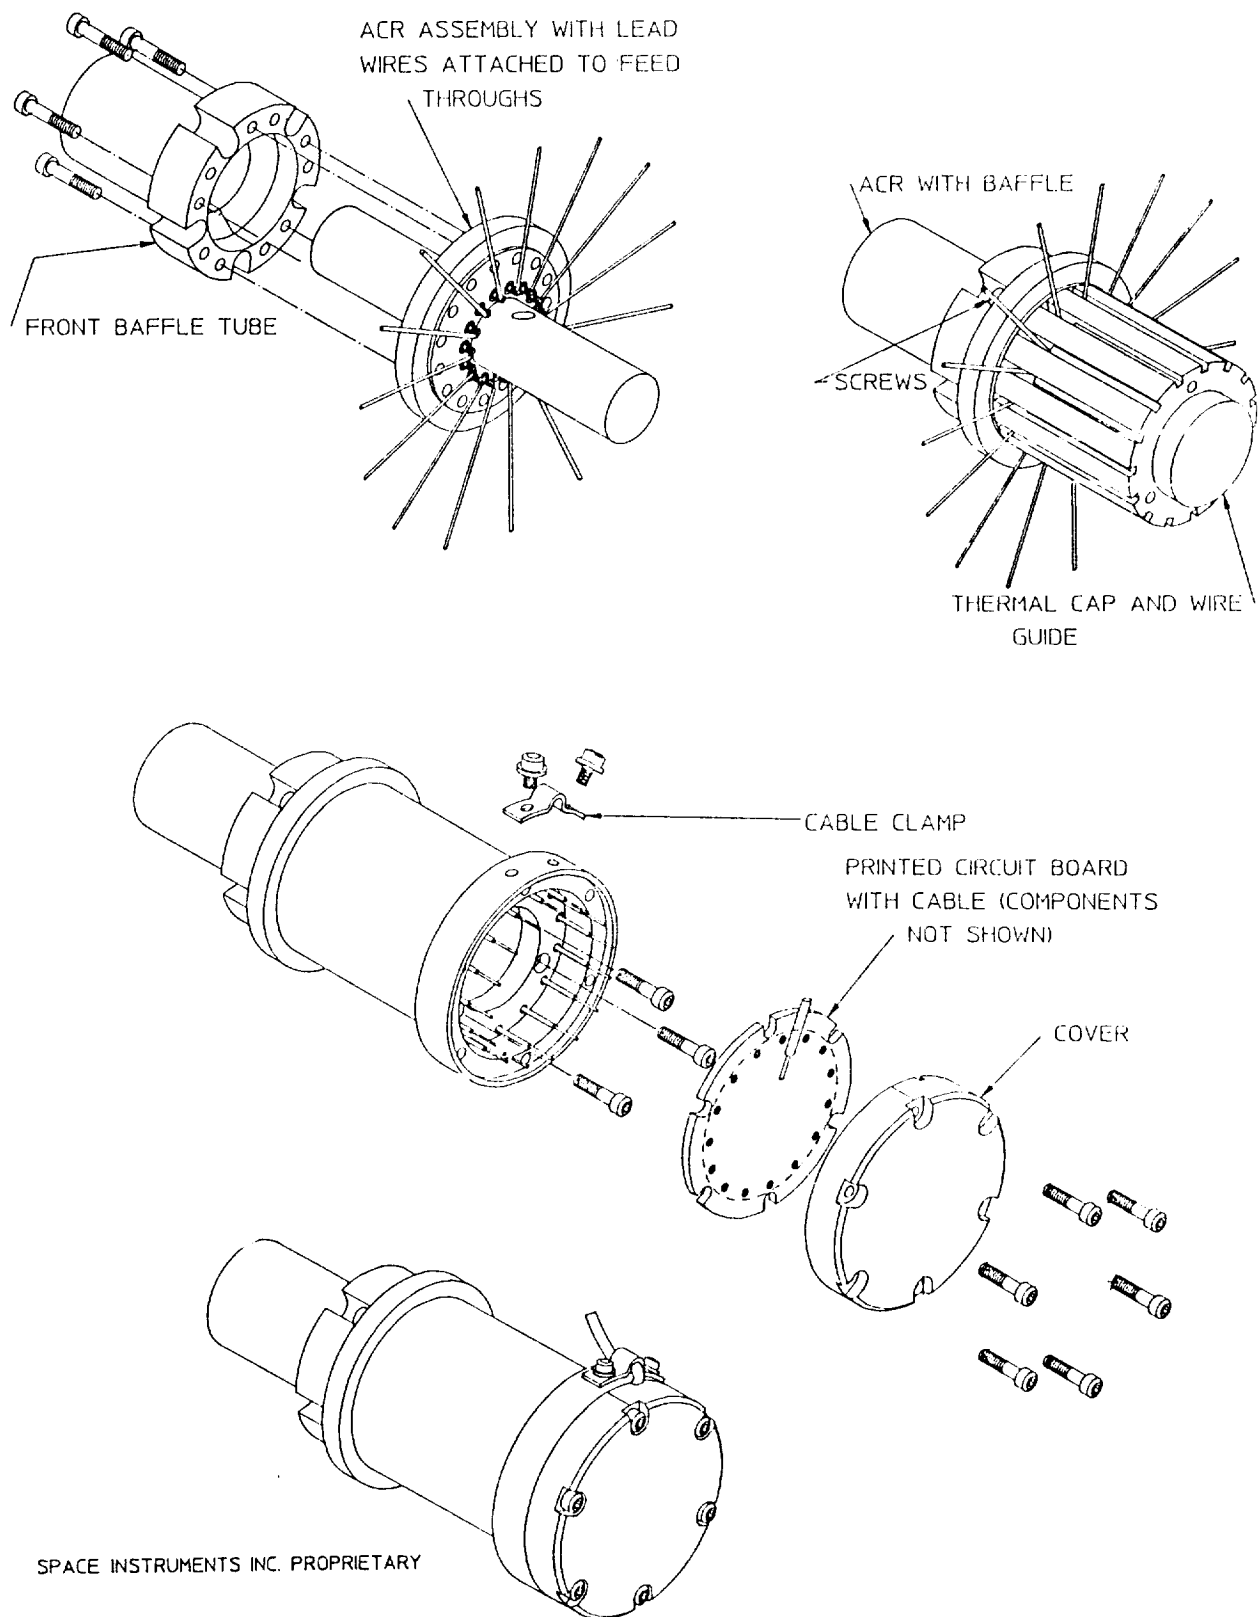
DETECTOR MODULE - EXPLODED VIEW
